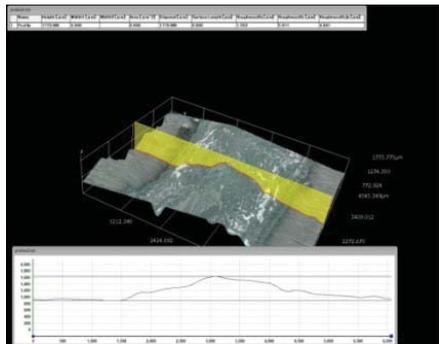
Visual testing of a weld's face surface geometry for Super 304 steel
